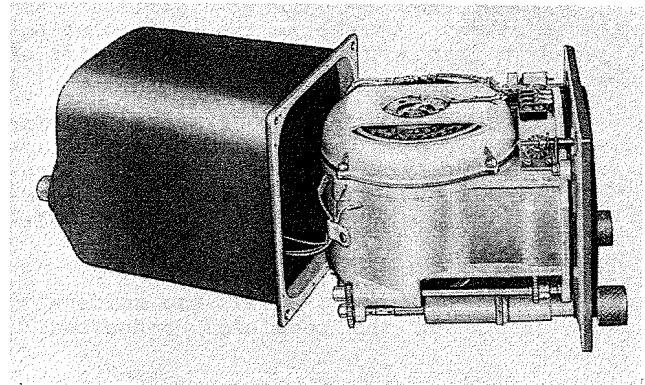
D. Removal of Clamp Holding Three Wires to Frame
